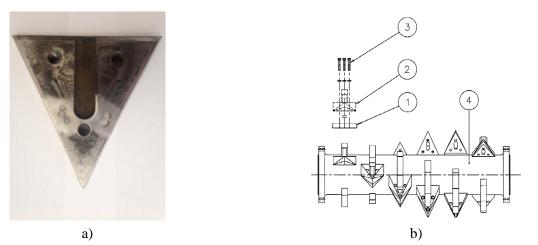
a) cutting (moving) knife, b) diagram of moving knives placement, 1 - moving knives, 2 - knife holder, 3 - bolts fixing the moving knives to the holder, 4 - rotor.
